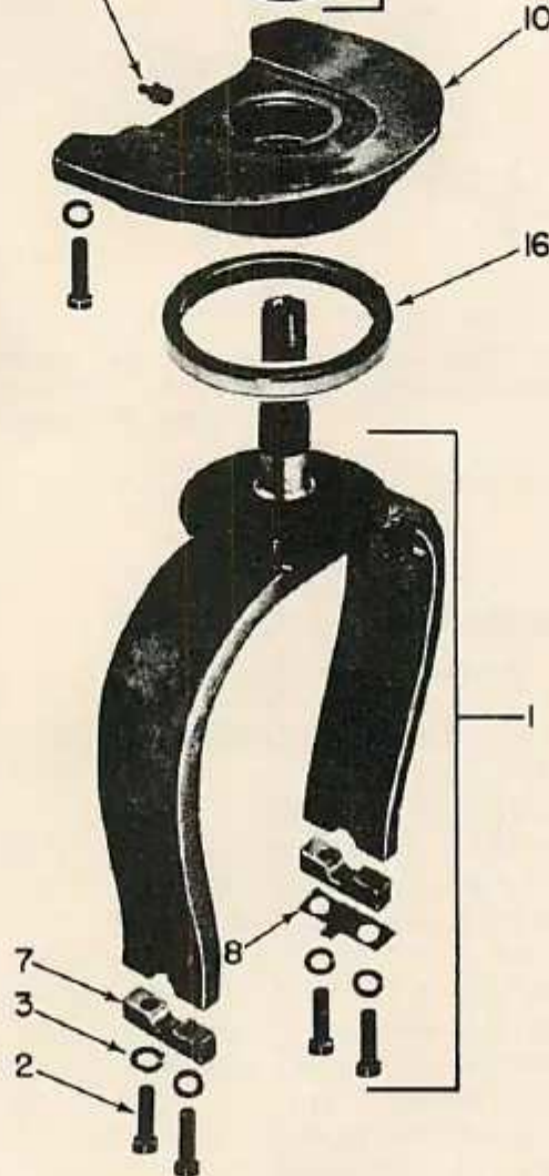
Exploded view of single front wheel front support (carrier) and related parts used on power steering models. Refer to Fig. O9 for manual steering models, and for 7.50-16 tire adapter.
